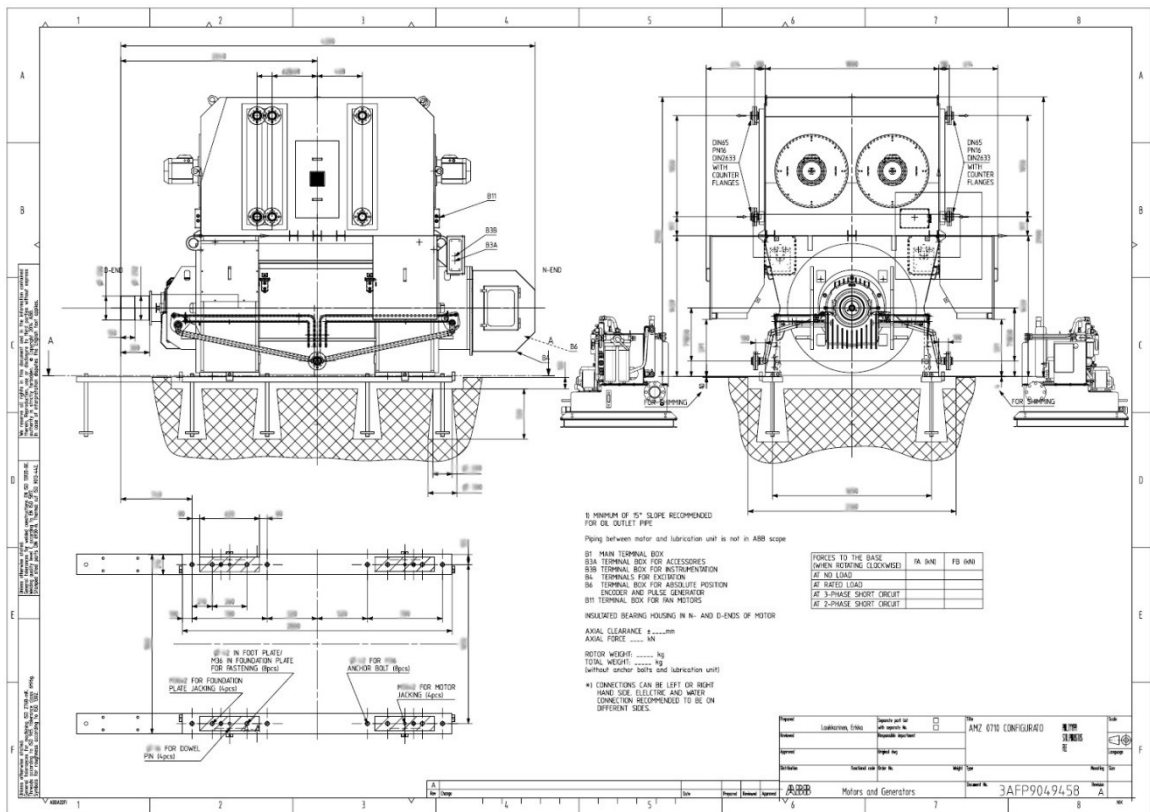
The main dimension drawing of AMZ 0710 configurator.
